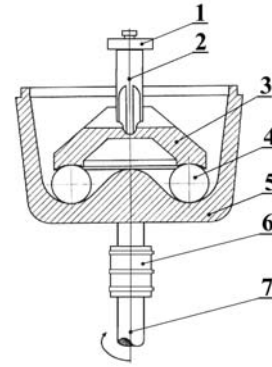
1 – Force sensor – C2 (HBM), 2 – Upper shaft transferred force of pressure, 3 – Upper grinding unit (ring), 4 – Grinding balls, 5 – Lower grinding unit, 6 – Sensor of rotary moment – SK5/55 (HBM), 7 – Lower shaft drive lower grinding unit.
